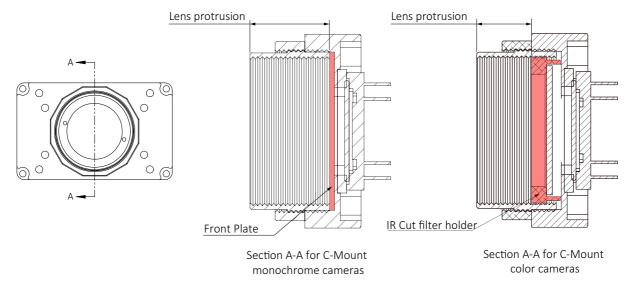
Cross section of typical Prosilica GT camera front assembly with C-Mount
